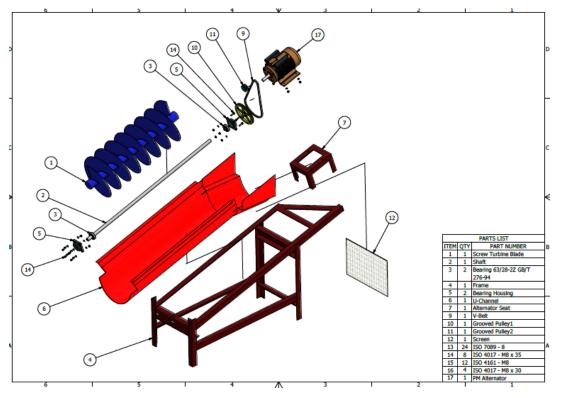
Exploded view of Screw Shaft Flywheel Stabilizing Hydro Turbine
